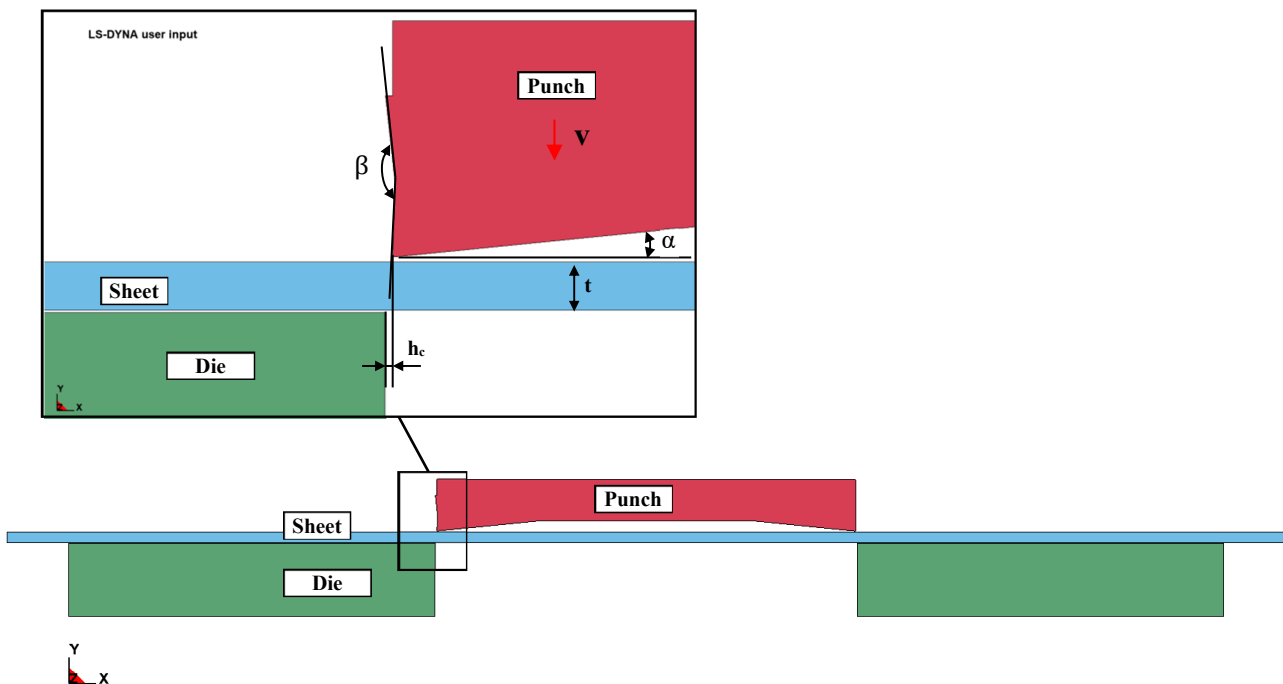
Blanking process with new tool geometry: α – rake angle of cutting edge, β – rake angle of side edge, h_c – blanking clearance, t – sheet thickness, v – blanking speed
